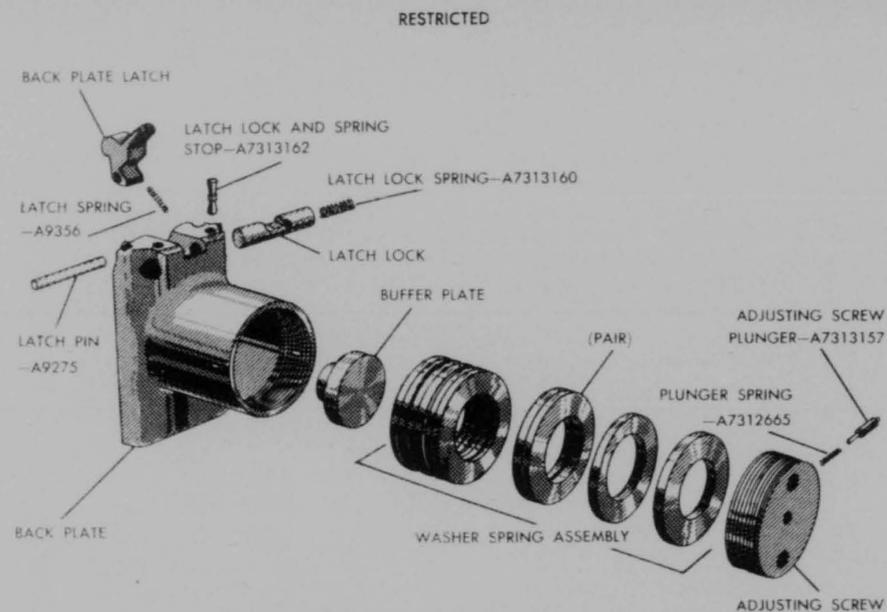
Backplate Assembly—Exploded View—Right Side and Bottom.
